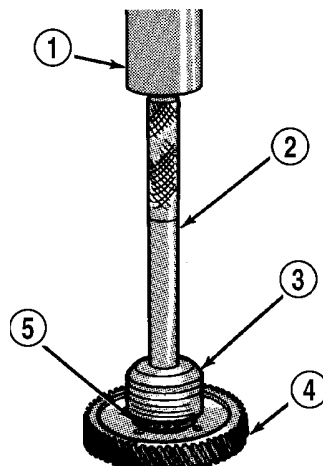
Install Transfer Shaft Gear Bearing Cone
